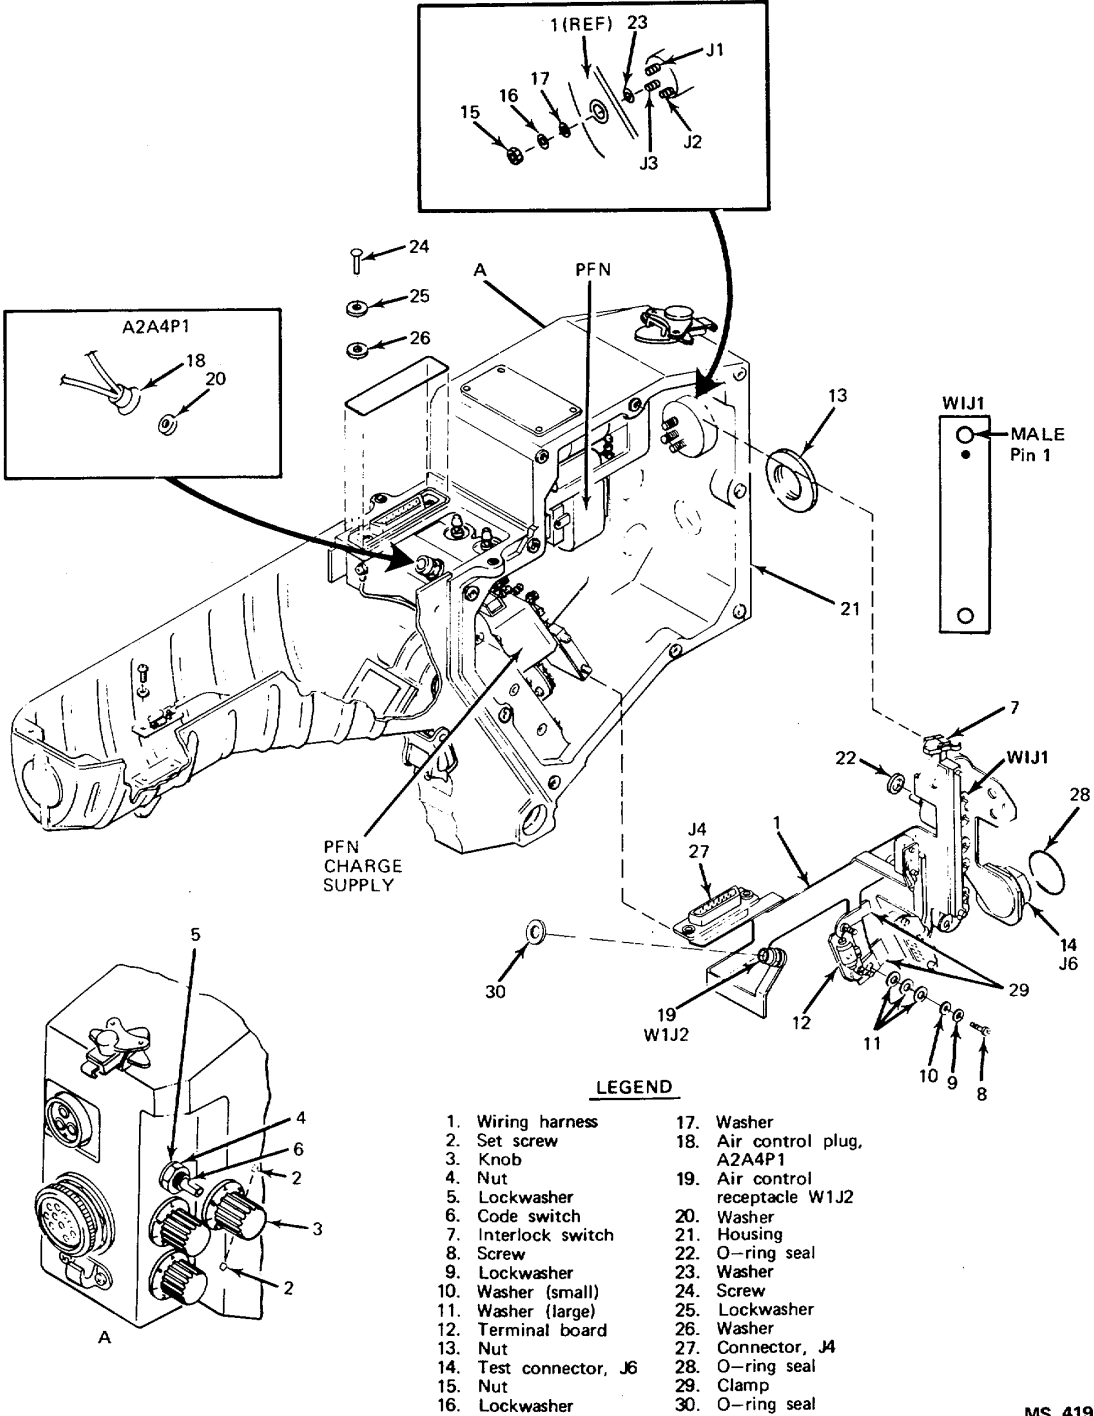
Removal and Installation of Wiring Harness (A2W1)
